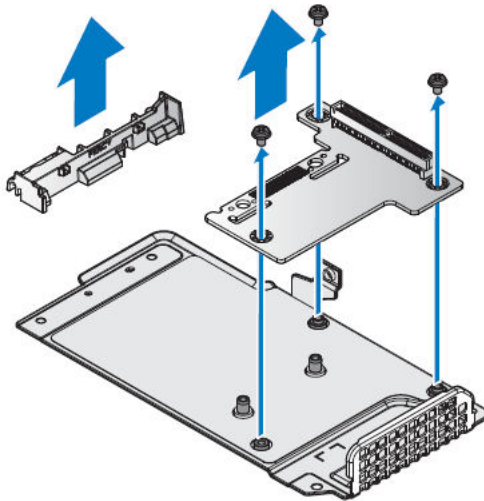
Removing the bridge board from the Mini PERC assembly
